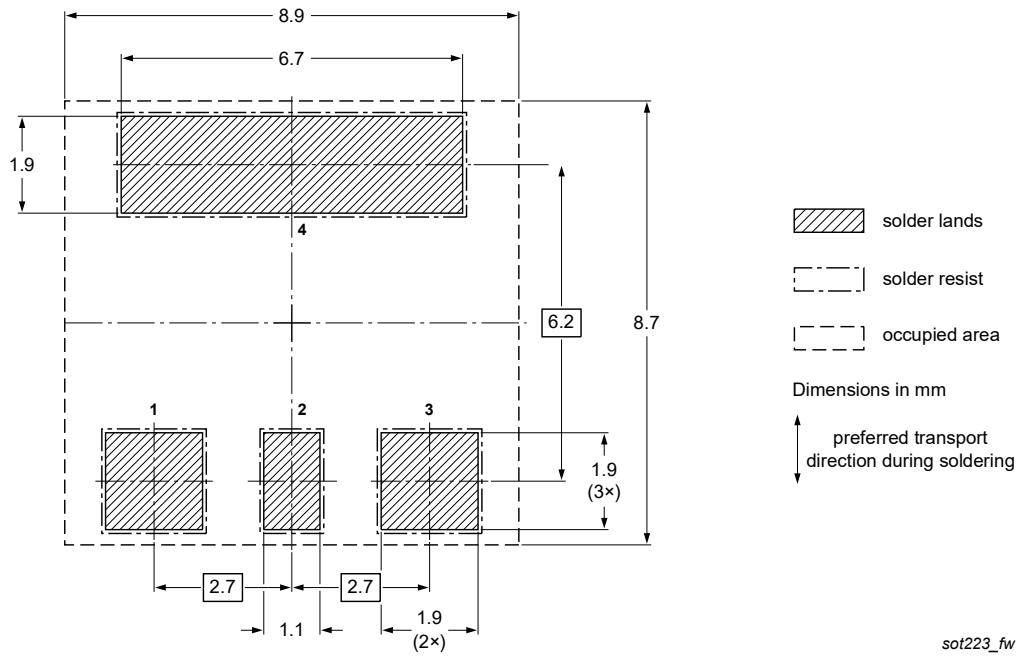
Wave soldering footprint for SC-73 (SOT223)
